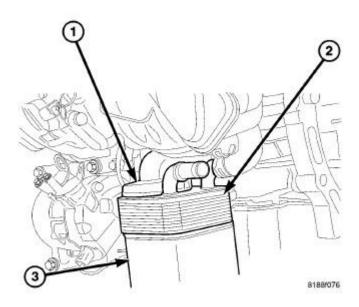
Oil Cooler Adapter, Oil Cooler & Oil Filter Courtesy of CHRYSLER GROUP, LLC
